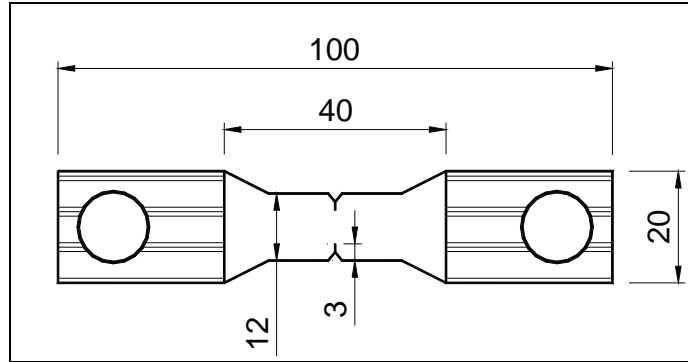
Double Edge Notched Tension (DENT) specimen dimensions (mm)
